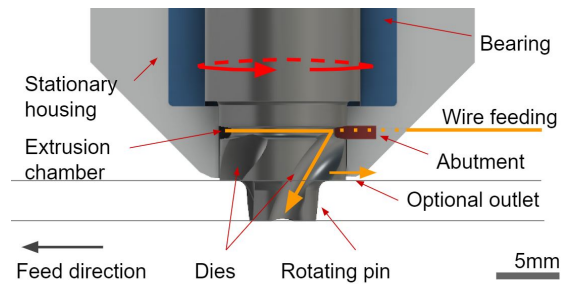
The PinPoint extruder is built around a rotating pin provided with an extrusion head with a set of helical dies through which the aluminium is allowed to flow [15].
